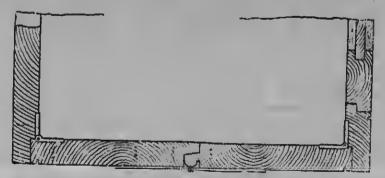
Part Horizontal Section of Collapsible Cupboard.
